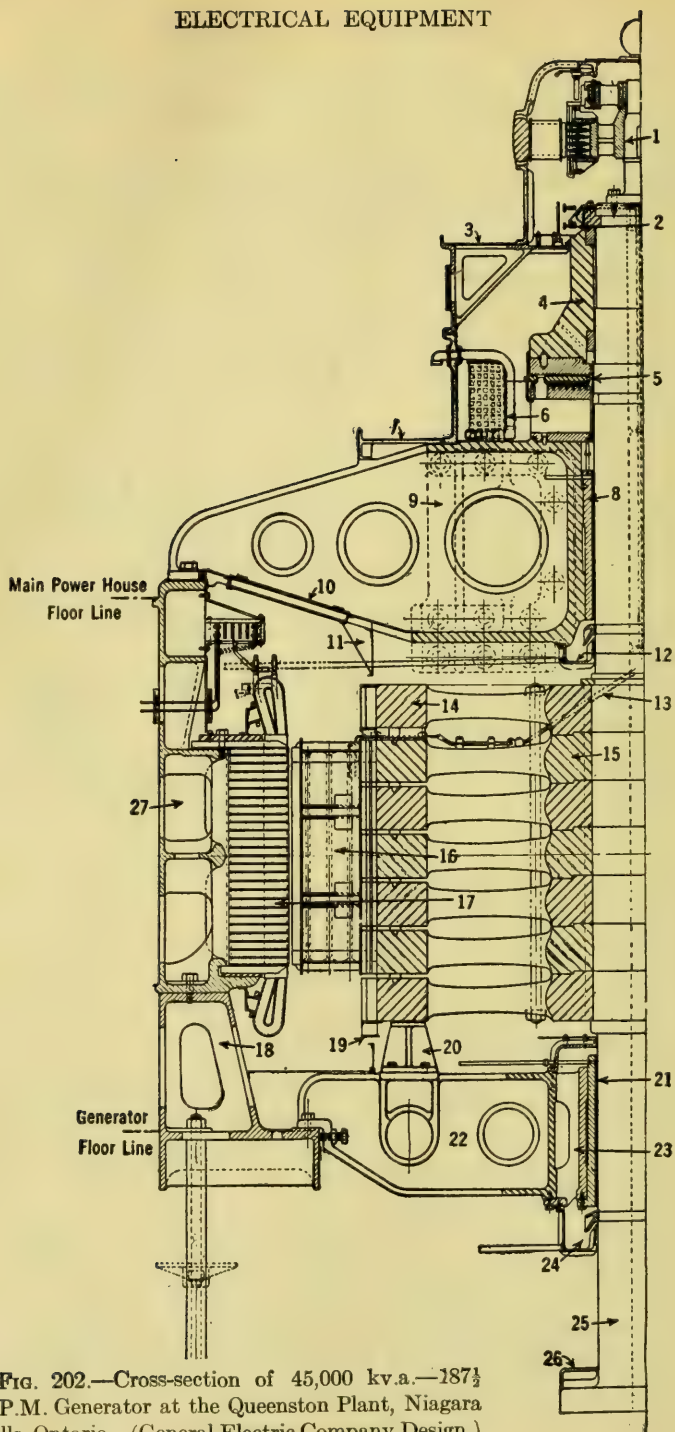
Cross-section of 45,000 kv.a.—187½ R.P.M. Generator at the Queenston Plant, Niagara Falls, Ontario. (General Electric Company Design.)
